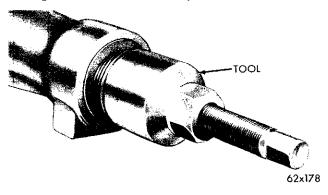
Removing Output Shaft Oil Seal (Imperial Models)
